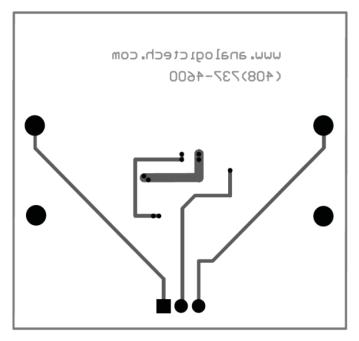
AAT1130 Evaluation Board Bottom Side PCB Layout.
